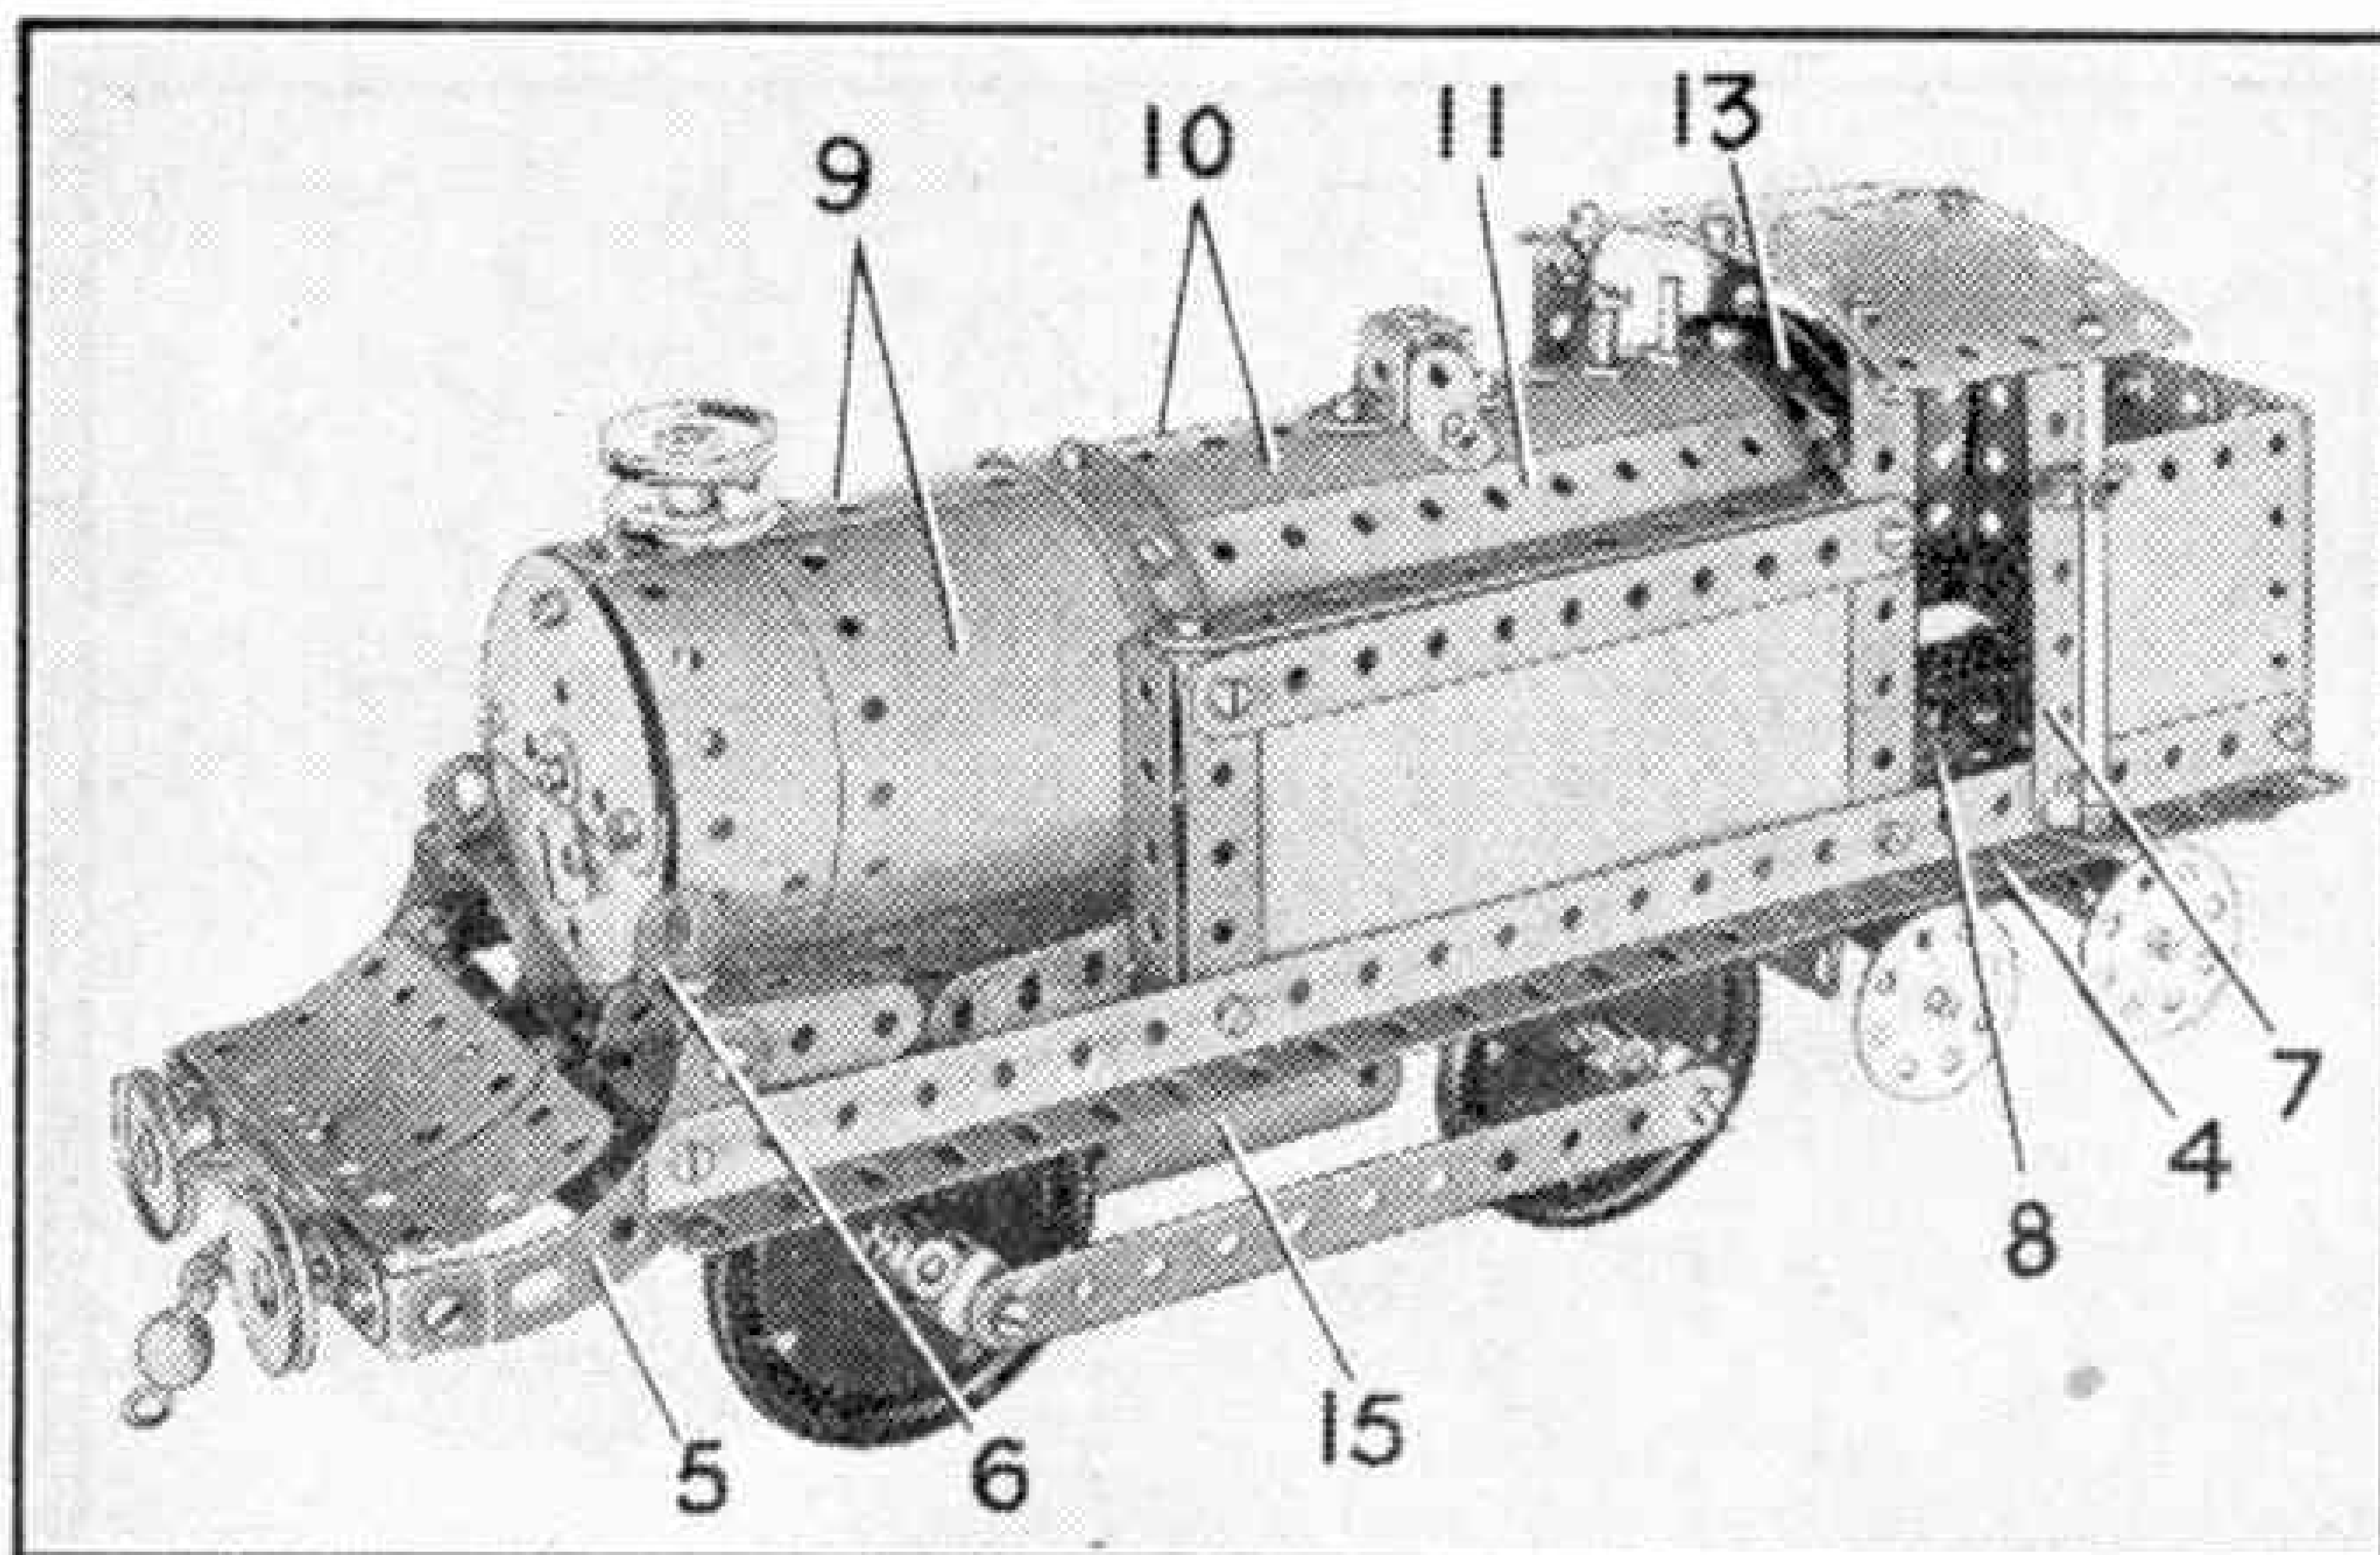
Outfit No. 5 contains all the parts required to build this typical tank locomotive.
